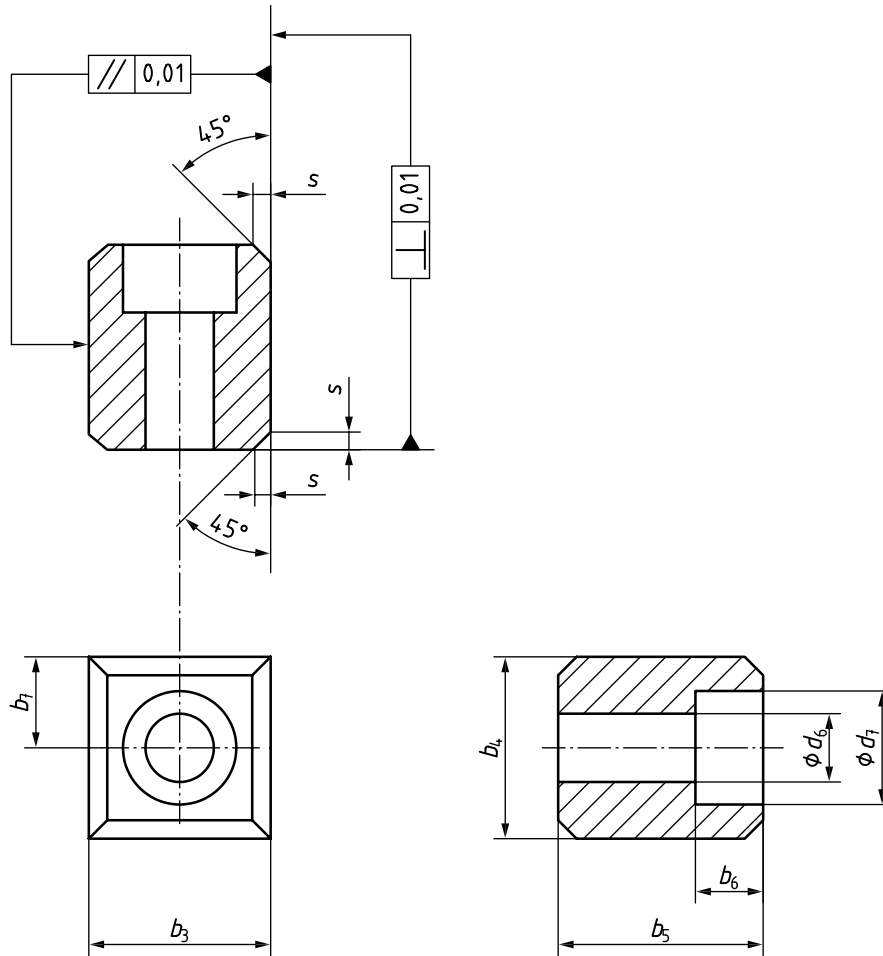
Tenon dimensions for spindle noses of form S and SF
